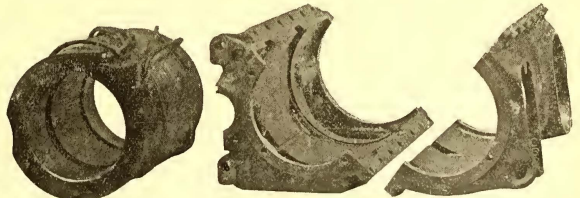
HOUSING AND INNER RING OF MOTOR
